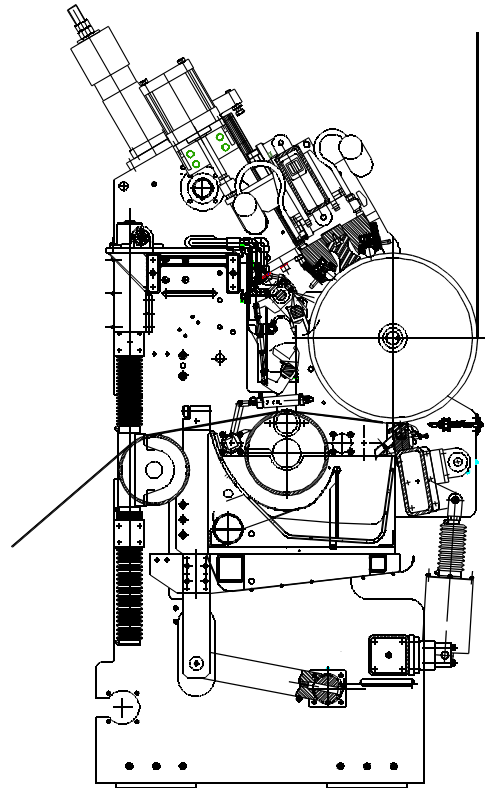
Air-Tube-Loaded Rod Coater with Enclosed Pond Applicator on Backing Roll
